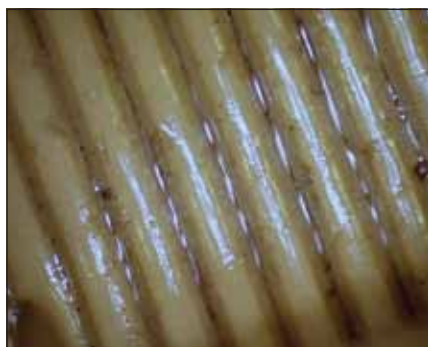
Bolt thread and removed coating show optimum oil deposition.
